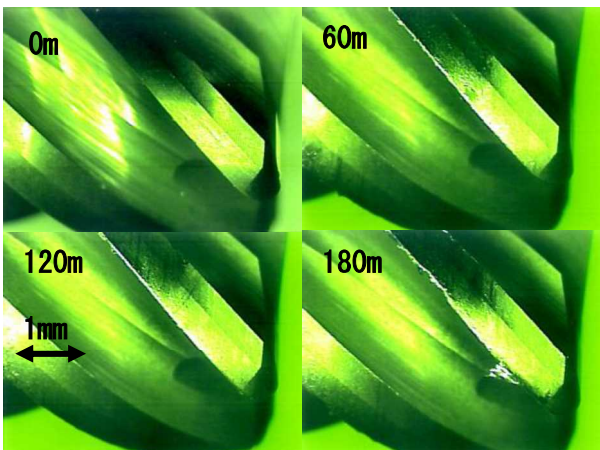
Photographs of cutting edge (experiment② Endmill(A) Workpiece: Ti-6Al-4V)
